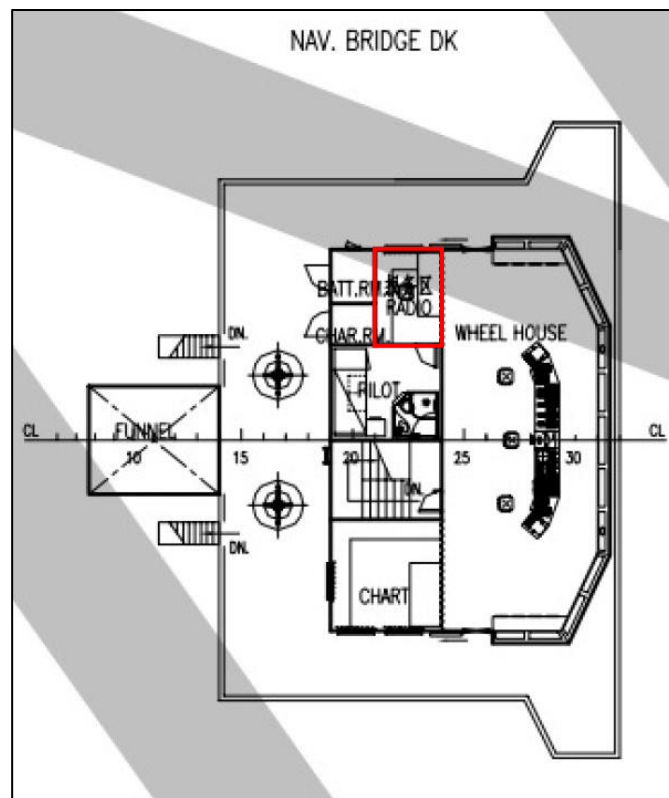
Extract of the GA plan, showing the bridge layout (radio room outlined in red)
